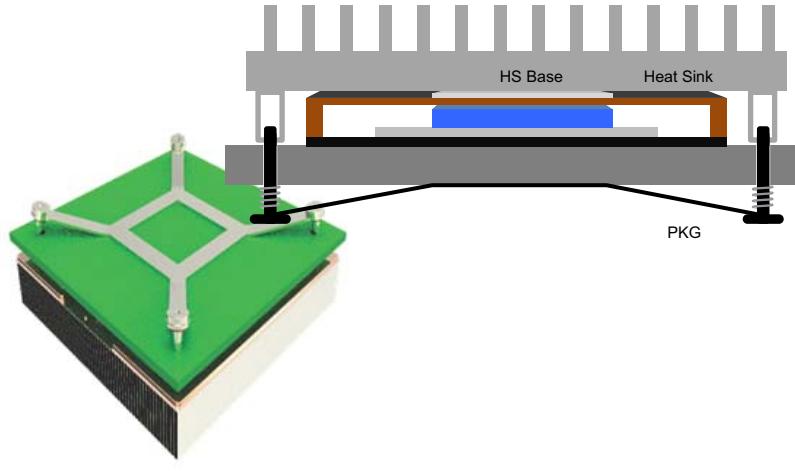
Dynamic Mounting and Bracket Clips on Heat Sink Attachment
